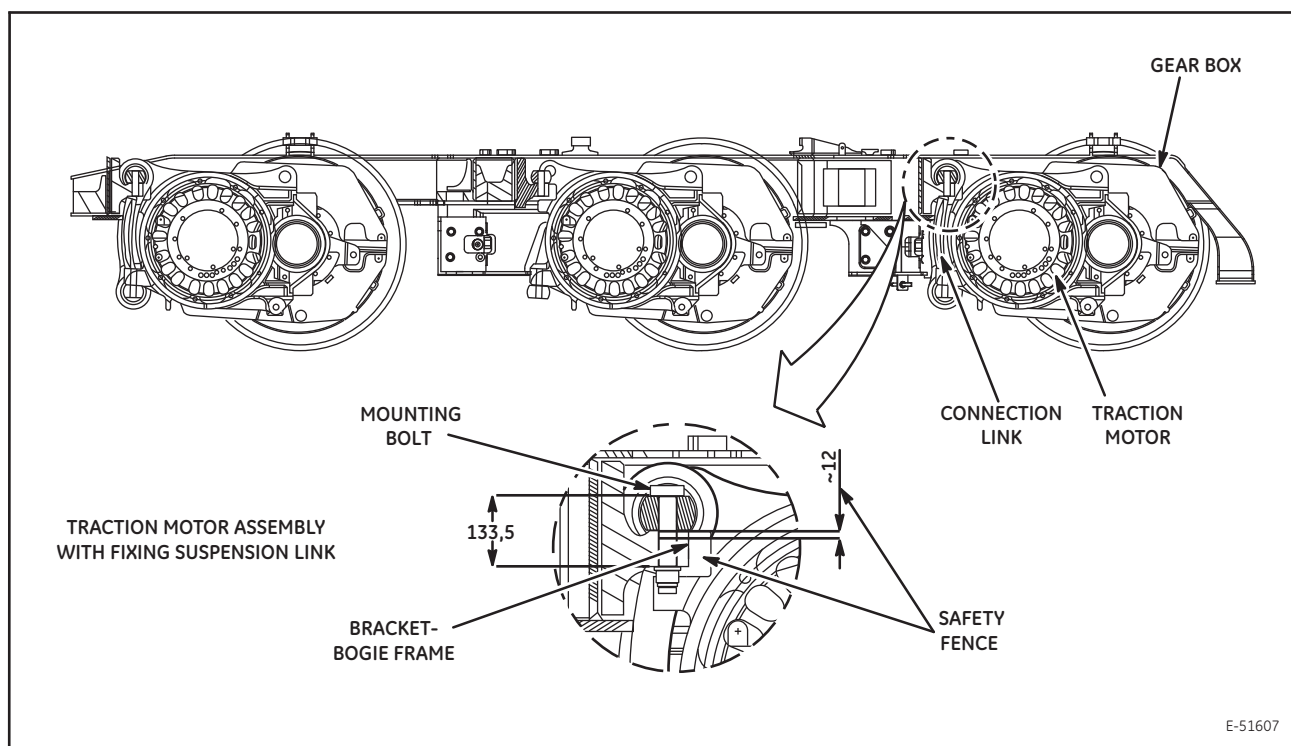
Traction Motor Assembly with Fixing Suspension Link
